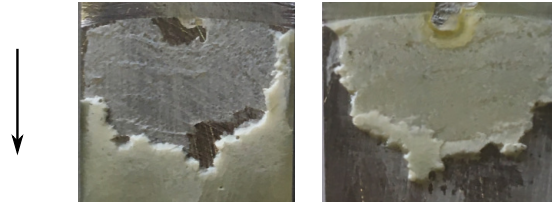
Failure surface of specimen Araldite<sub>53</sub>. Arrow shows the crack propagation direction.
